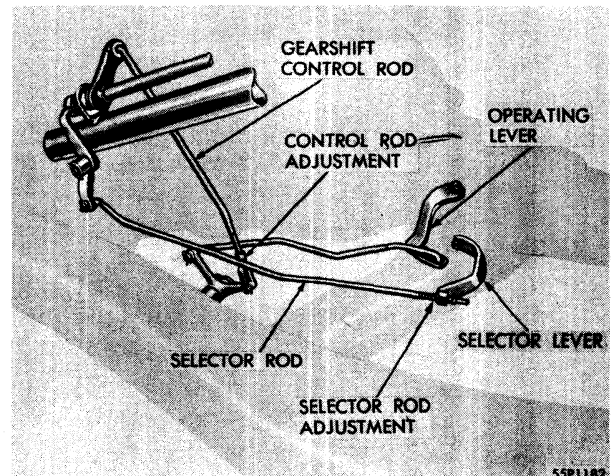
Adjusting Gearshift Selector Rod and Gearshift Control Rod
